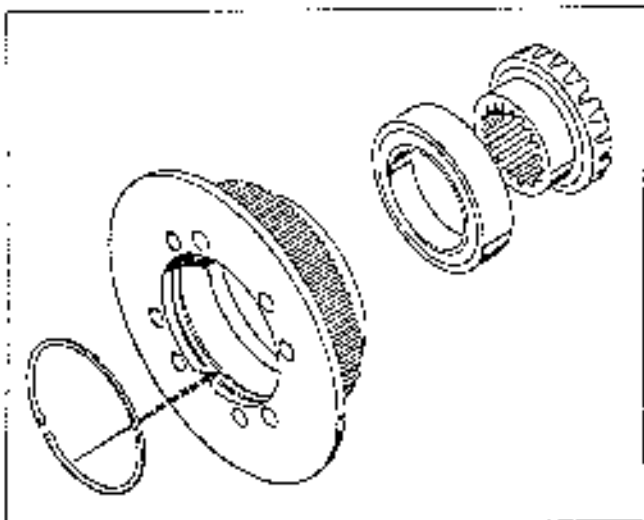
Forward Clutch Flange, Roller Bearing and Bevel Gear (snap ring in HP clutches only; location arrow applies only to clutch no. 1-00100-2419 and 1-00100-2420).
